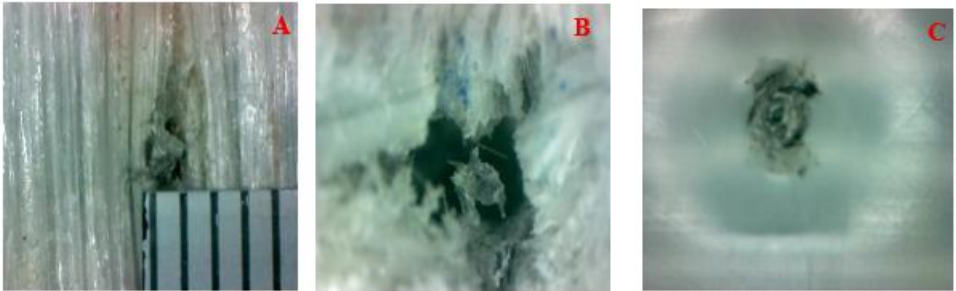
Penetration specimens under microscope. A) Face sheet damage size (1 mm) B) Face sheet fiber damage. C) Core top layer damage.
